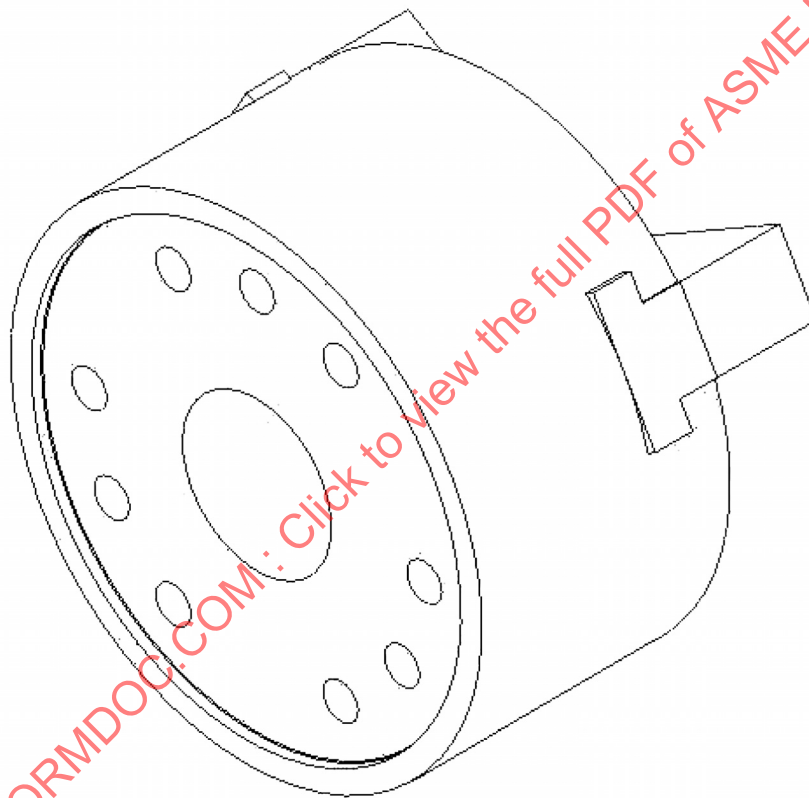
Type C Chuck and Faceplate Dimensions
